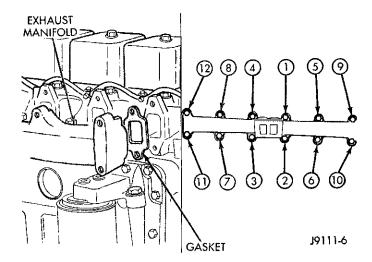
Exhaust Manifold Bolt Tightening Sequence
